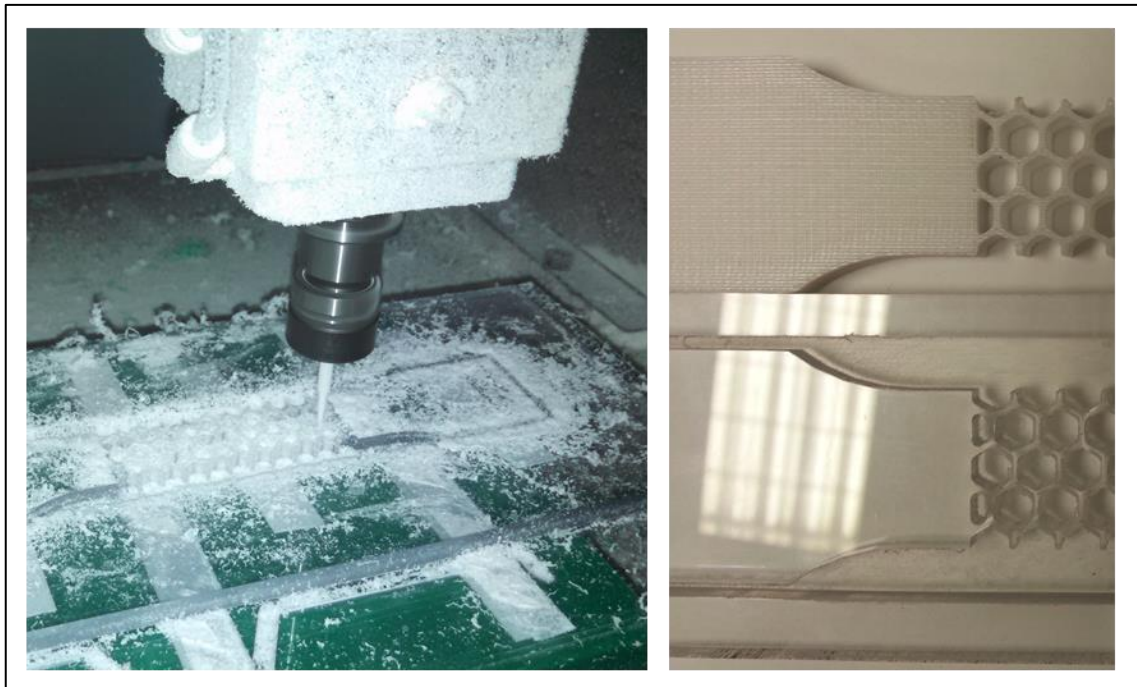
Milling process | comparison of FDM specimen (top) with milled specimen (bottom)
